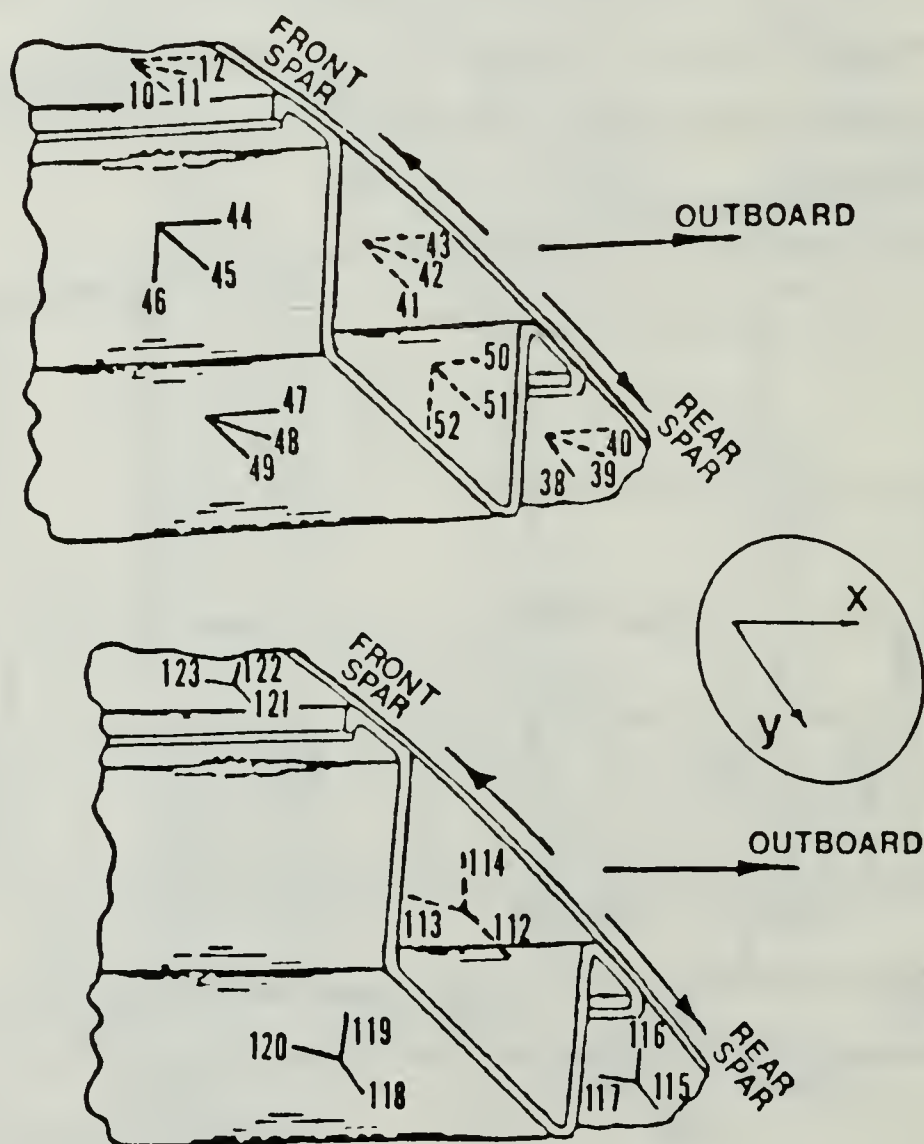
A P2V Starboard Wing, Strain Gage Locations, Top of Test Section, Interior
